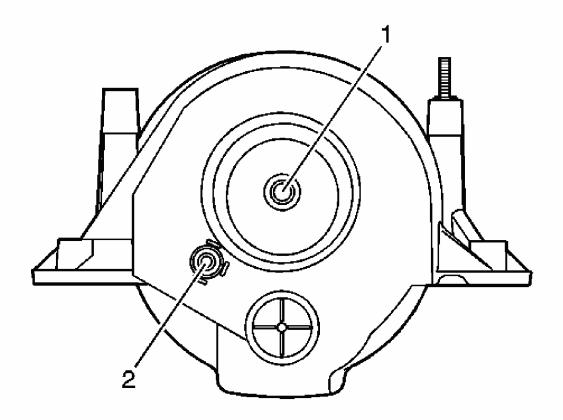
Inspecting Intake Manifold For Damage To PCV System Hose & Vacuum Ports
